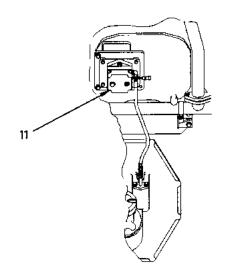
Engine Mounted Sensors Right Side View (11) Crankcase pressure sensor.
